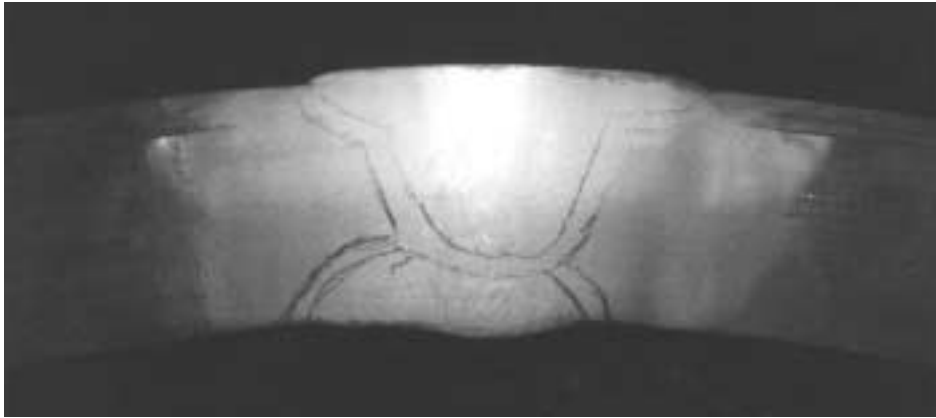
Image of the macro-etched end of the hot reheat piping spool piece. The etching identifies the asymmetry of the double-V seam weld.
